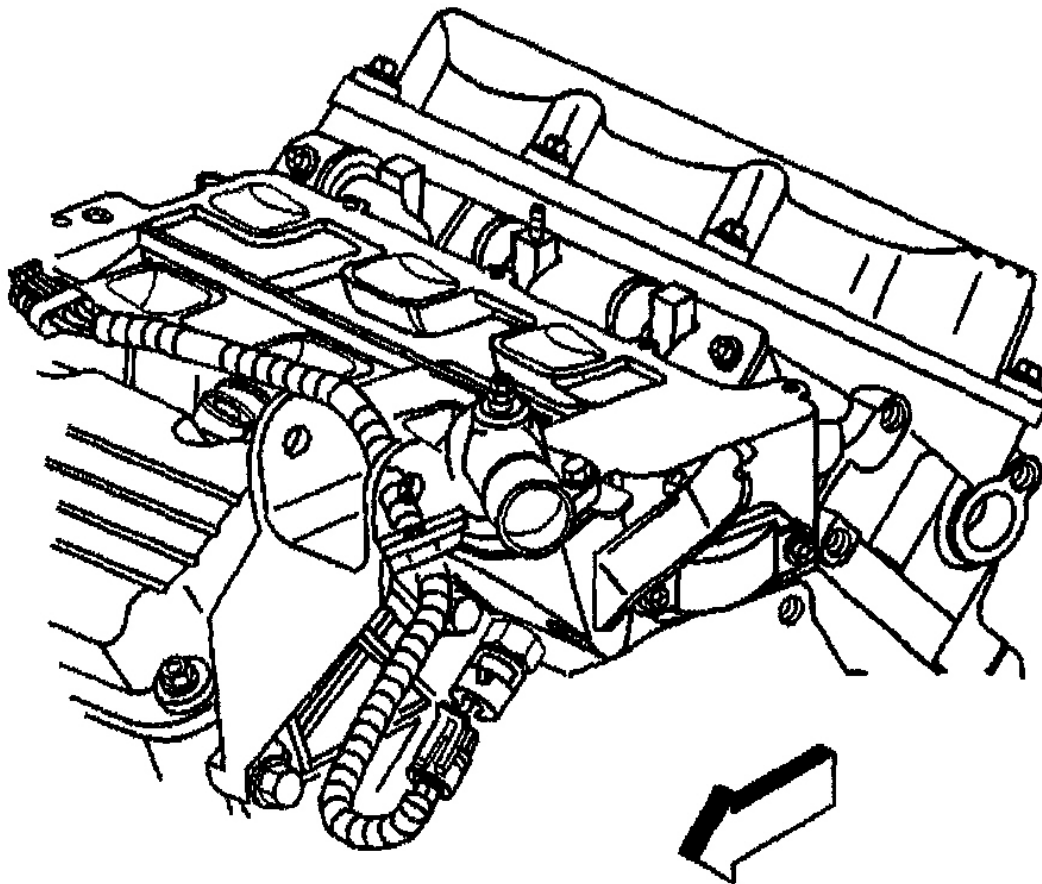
Water Outlet Housing, Gasket & Thermostat
